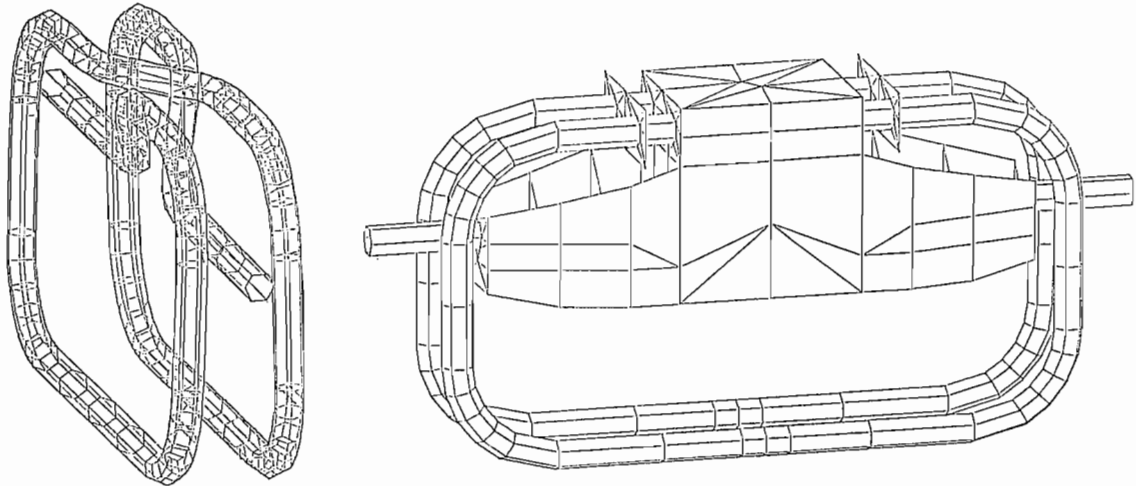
Finite element presentation of a measuring tube arrangement and its mounting
